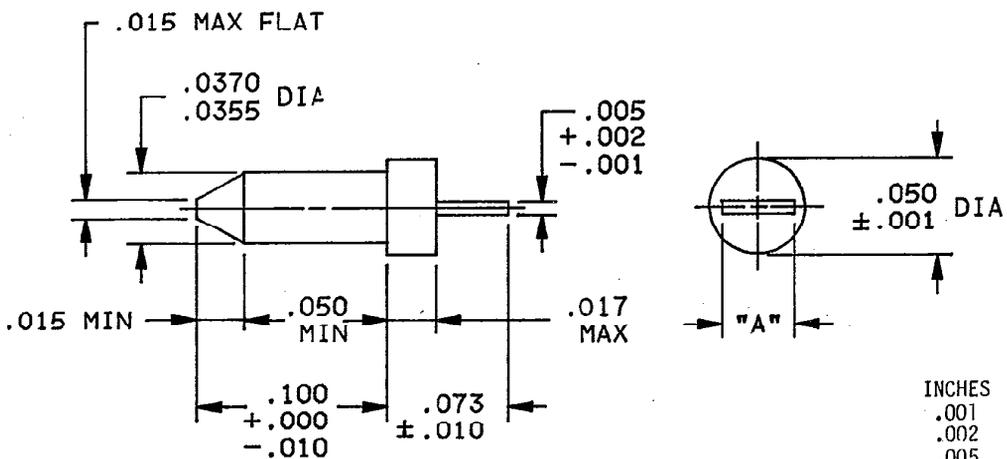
Series SMA (.115 inch minimum) socket contact (4 hole) flange mounted receptacle.
